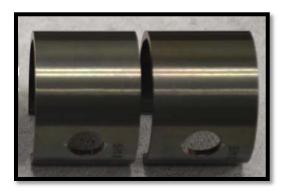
C-Ring coupons after testing at 300°F. No cracks or pitting were observed.
